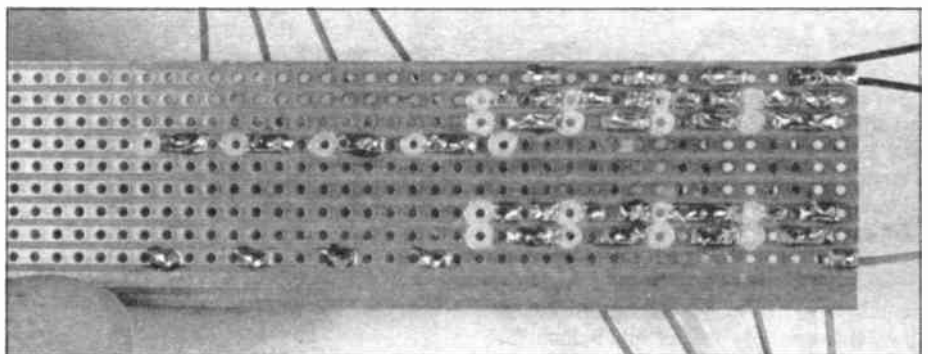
The copper side view of the TTL switch board (0.1in. pitch Veroboard).
